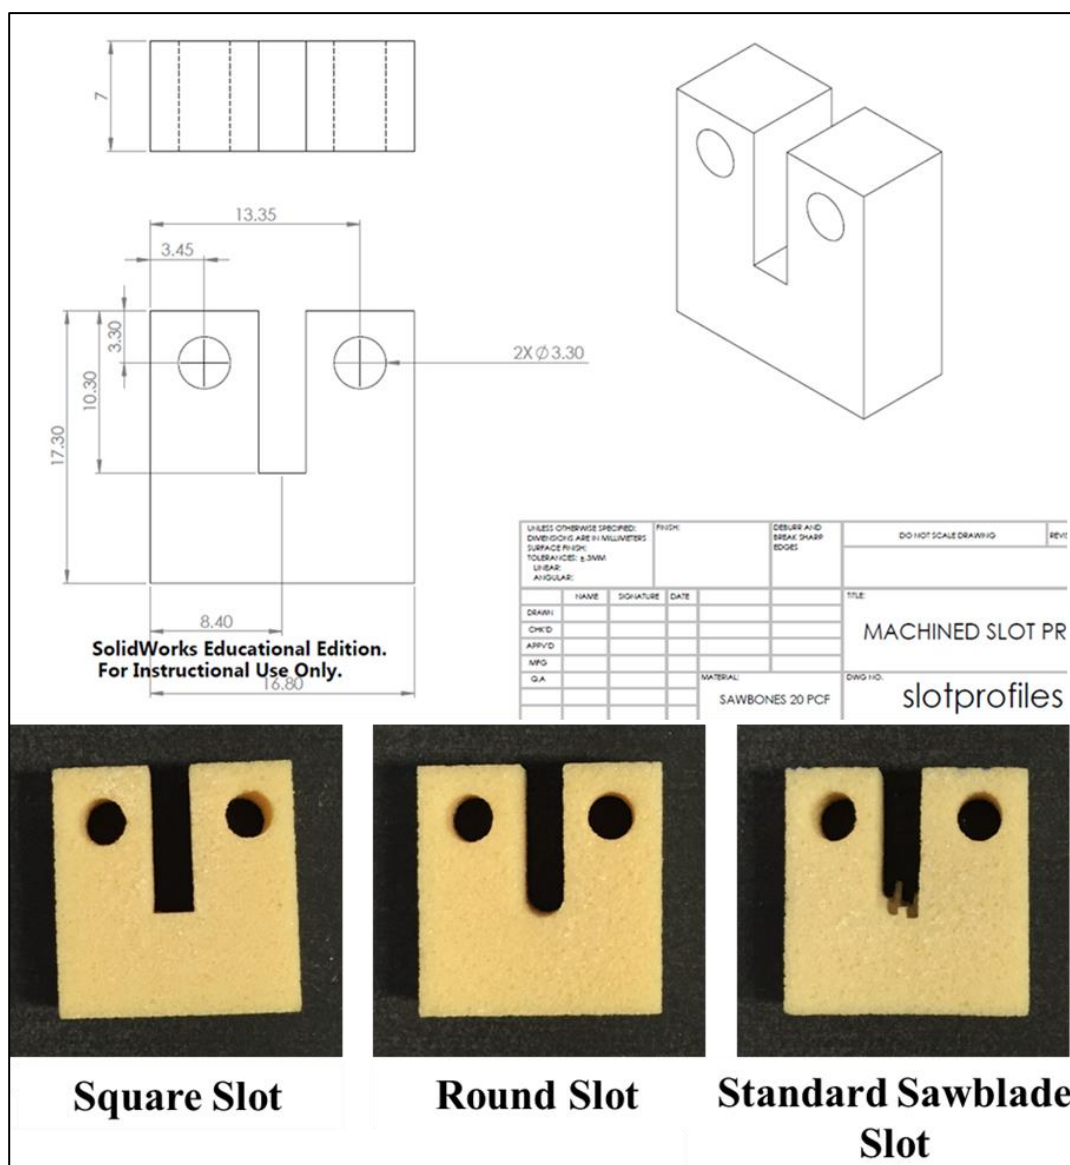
Top: Drawings for compact tensile testing specimens to be made in 20PCF solid rigid polyurethane foam with dimensions as required by ASTM E399. All measurements are in millimetres. Bottom: Examples of compact tensile testing specimens.
